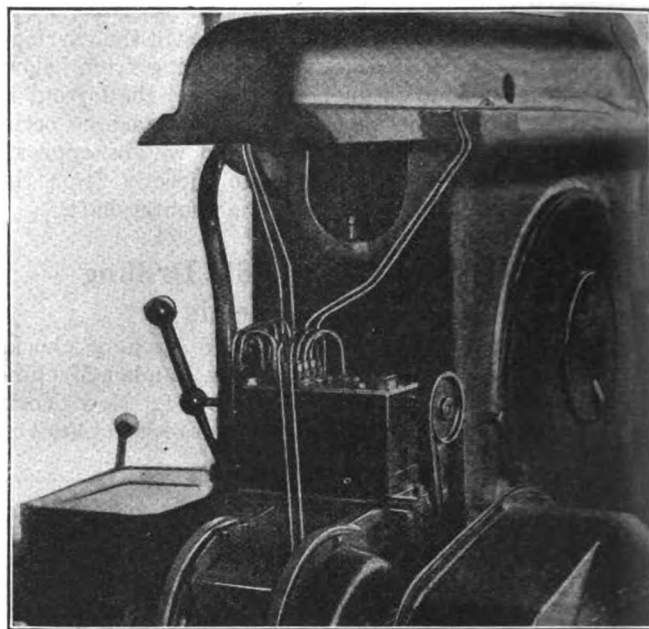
LUBRICATOR ATTACHED TO SHAPER
